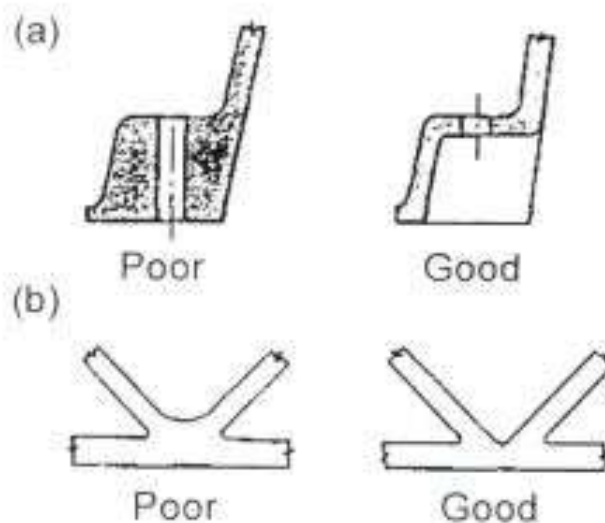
Examples of undesirable and desirable design practices for die-cast parts. Note that section-thickness uniformity is maintained throughout the part
